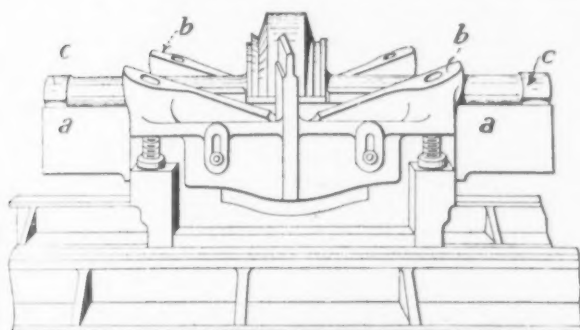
Lower Horizontal Roll with Bearing Plate
